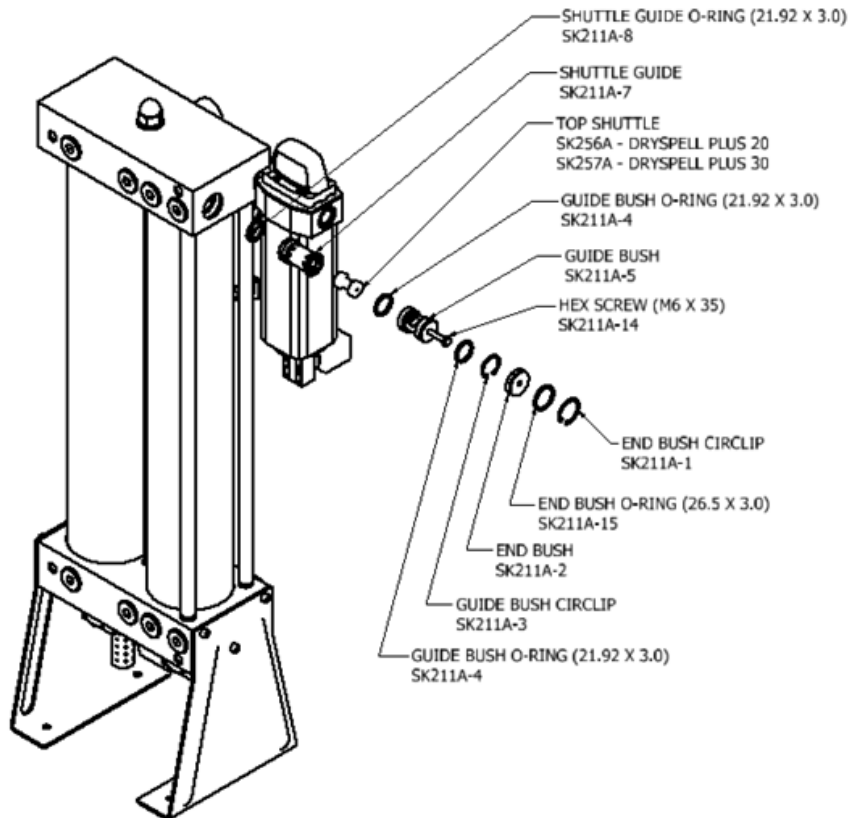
Exploded view to illustrate servicing of top shuttle in Dryspell Plus models 20 and 30
